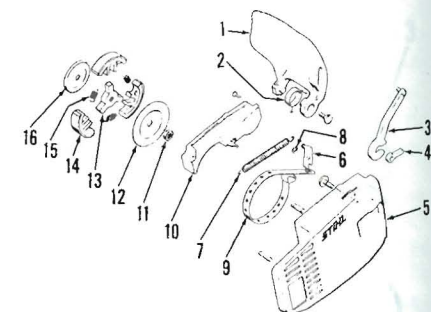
Exploded view of chain brake and clutch assembly used on some models.
